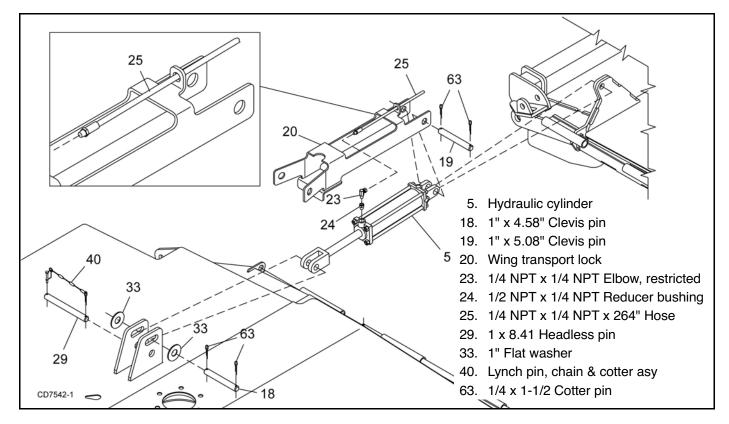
Wing Cylinder & Wing Transport Lock Installation
